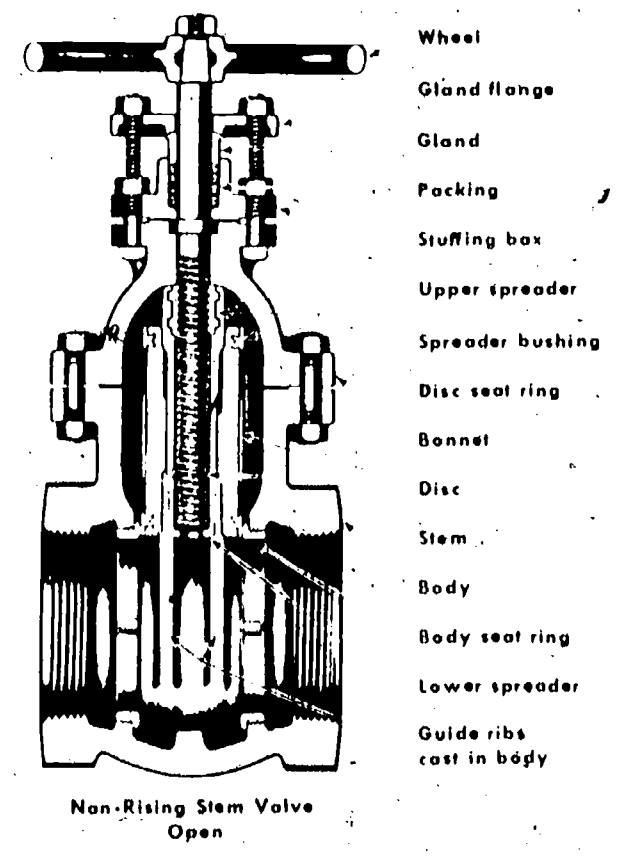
shows the details of a non-rising stem, inside screw valve in the open position.
